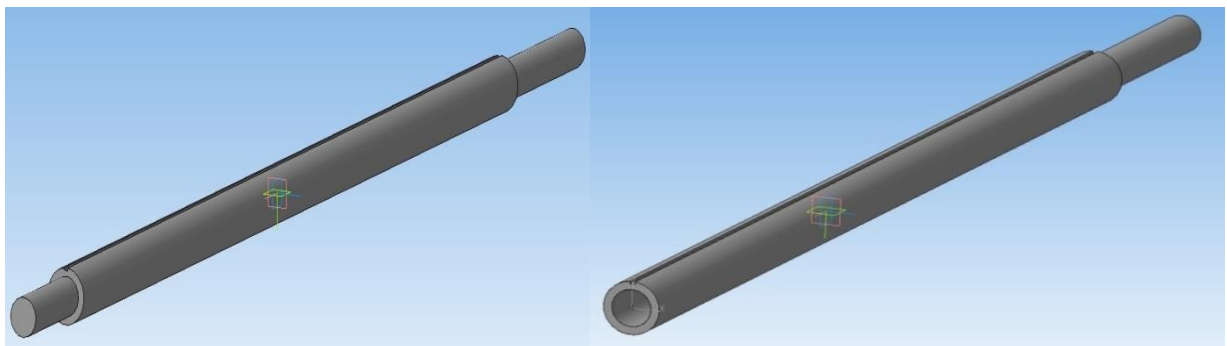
b. 3D view of the proposed hollow shaft construction.
